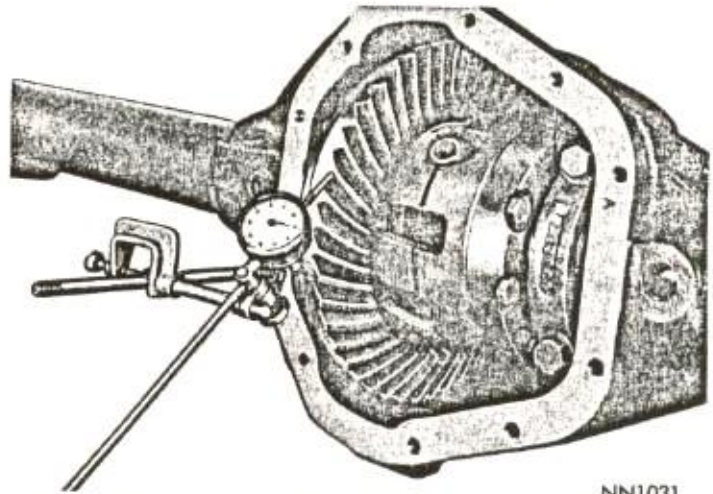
Checking Backlash Between Drive Gear and Pinion
